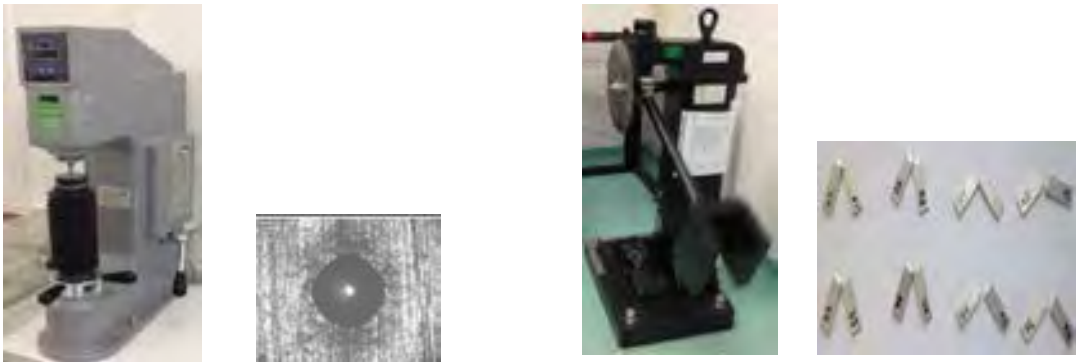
a) Hardness measurement equipment and measurement trace, b) Charpy equipment and tested Charpy samples
